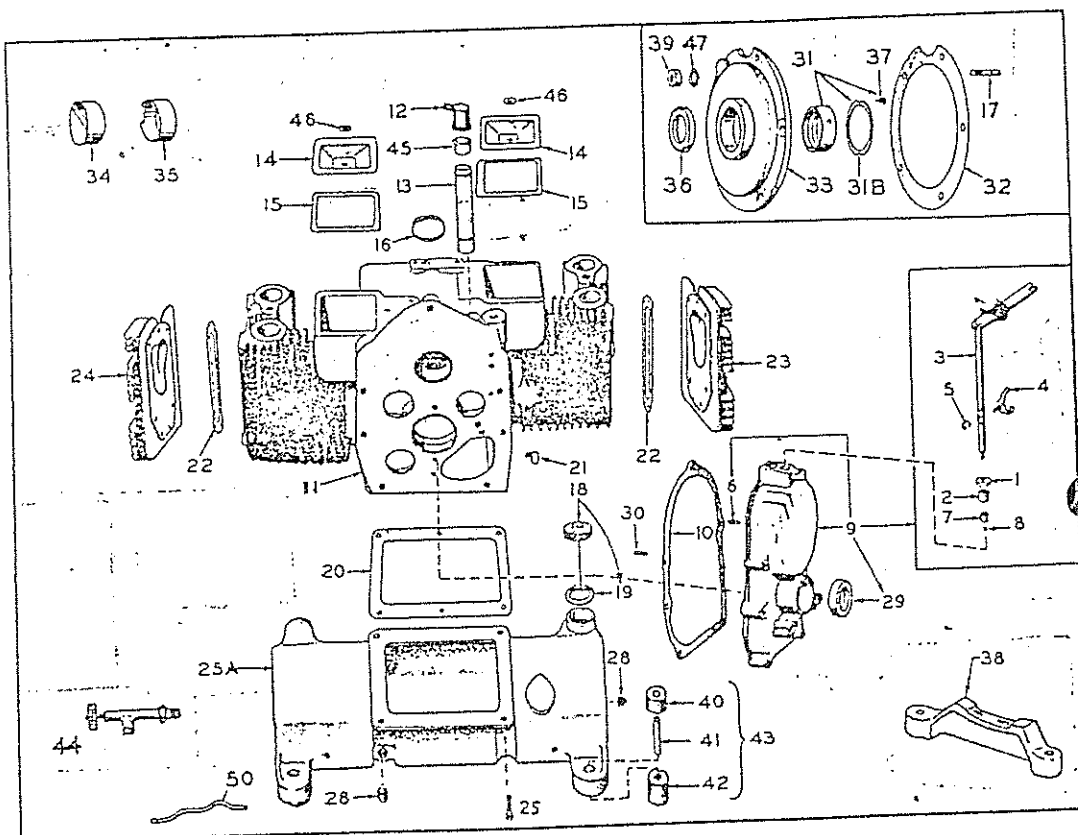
Fig A - CYLINDER, BLOCK, OIL BASE & GEAR COVER GROUP.
